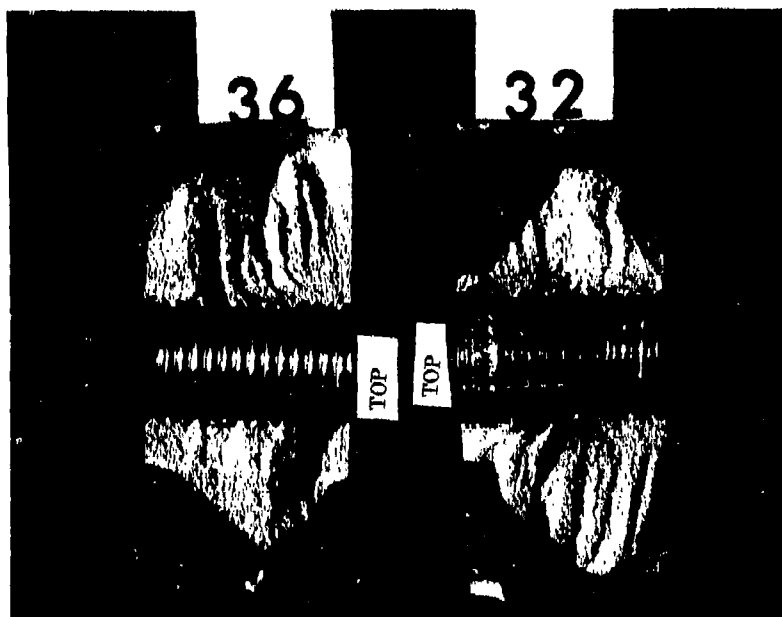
Close-up of Fatigue Failure of Specimens with Heli-Coil and Rosan 1/4-28 Size Inserts. Inserts Installed by Manufacture. No Bolt in Inserts.
